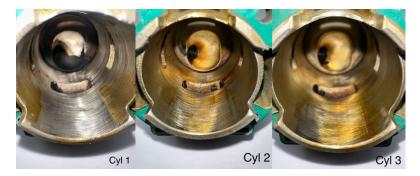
Exhaust-side cylinder bore and combustion chamber.
